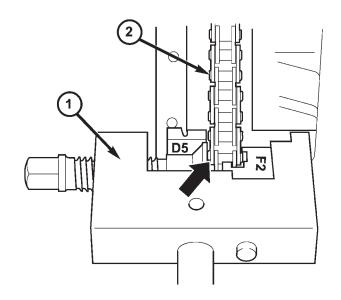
INSTALLING RIVETING INSERTS INTO RIVETING TOOL
